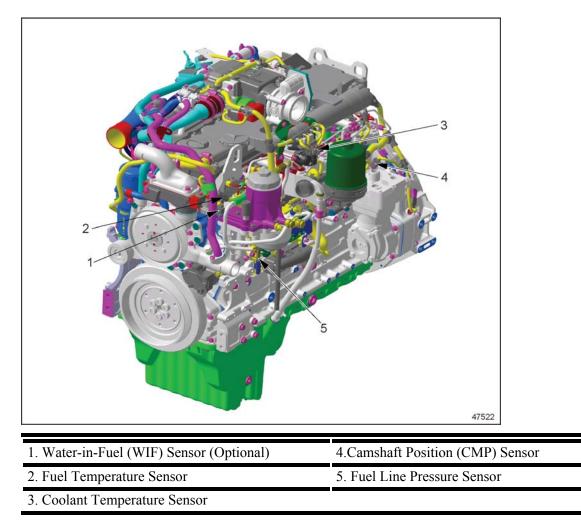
Sensor Location on the Left Side of the MBE 900 EGR Engine
